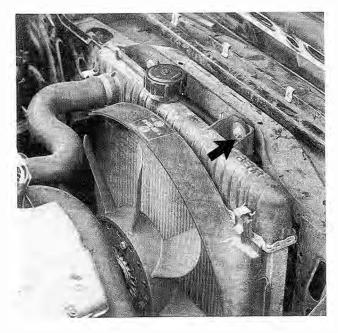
Radiator mounting nut on cars with 4-cylinder engine (arrow).
